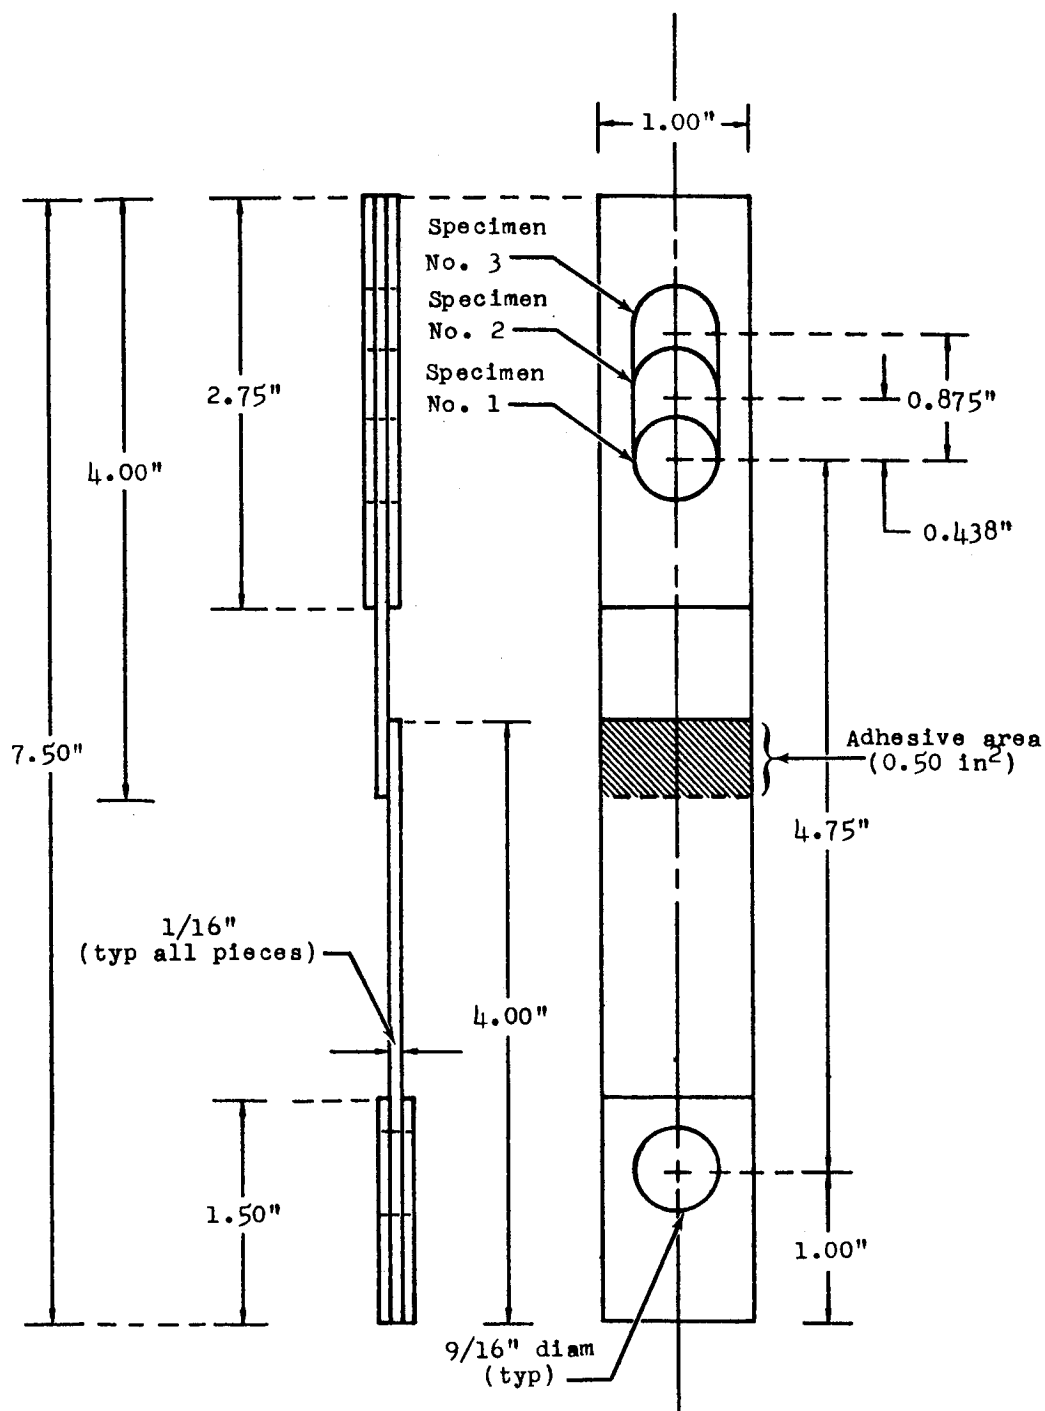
Sketch of Lap-Shear Specimen: Material B
